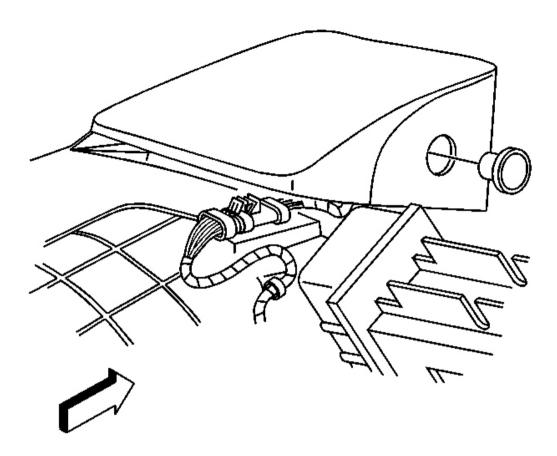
Headlamp To Headlamp Bezel Courtesy of GENERAL MOTORS CORP.
